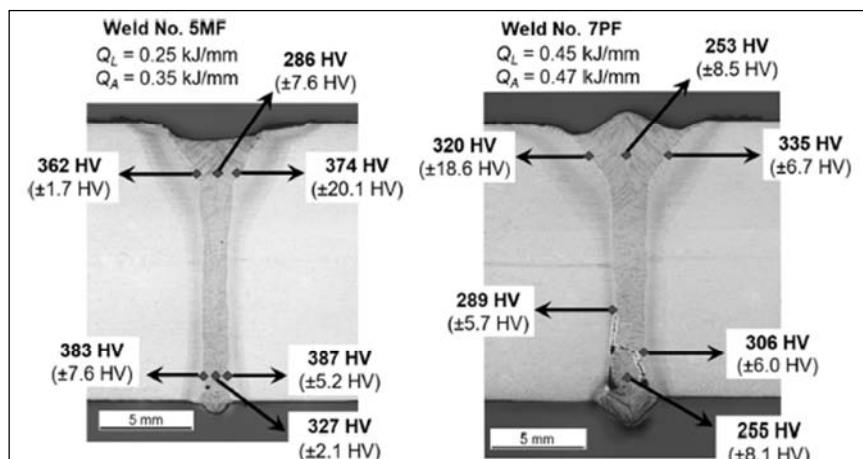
Cross-section of 15mm hybrid weld performed with a different output power of the heat sources [11]
